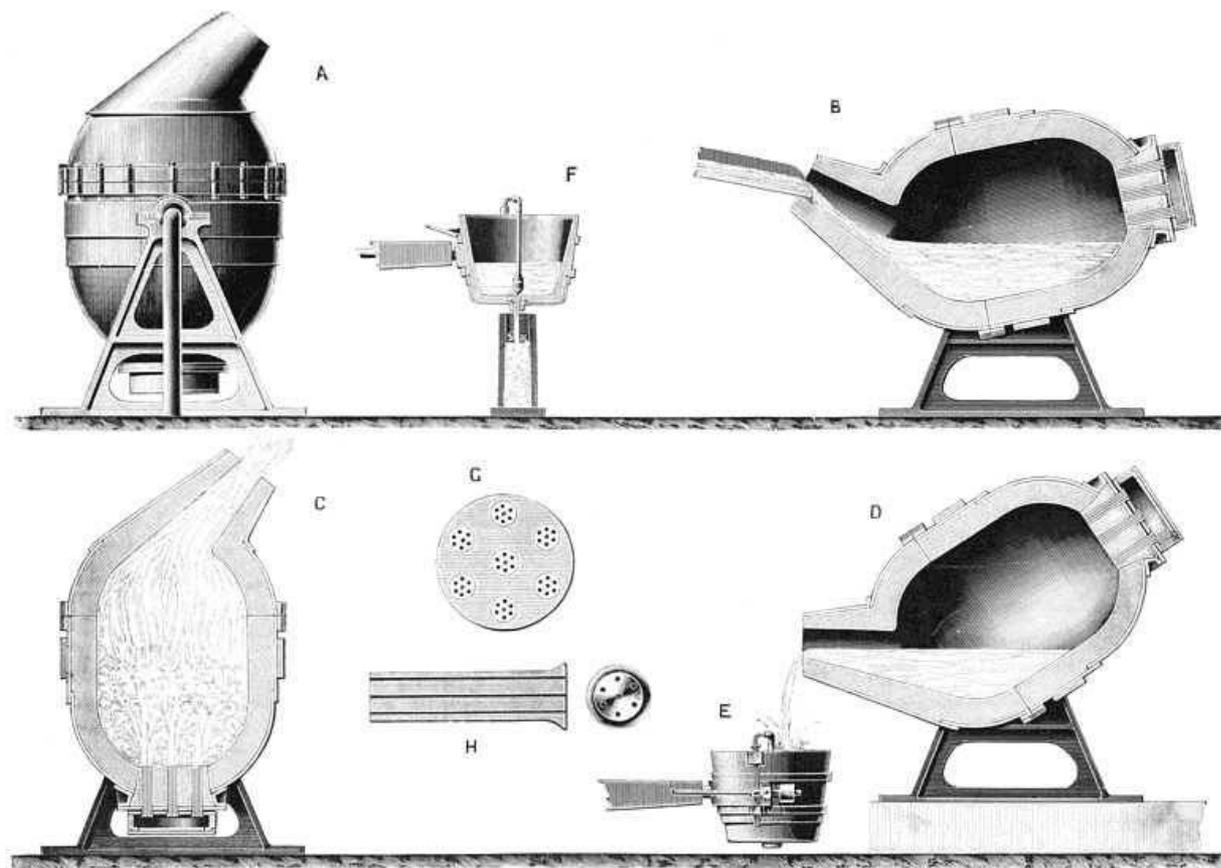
THE FIRST FORM OF BESSEMER MOVABLE CONVERTER AND LADLE
